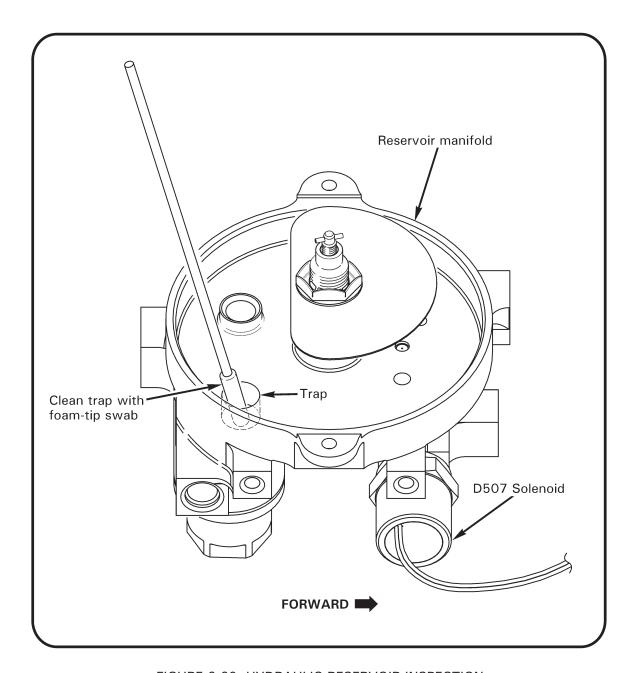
HYDRAULIC RESERVOIR INSPECTION
